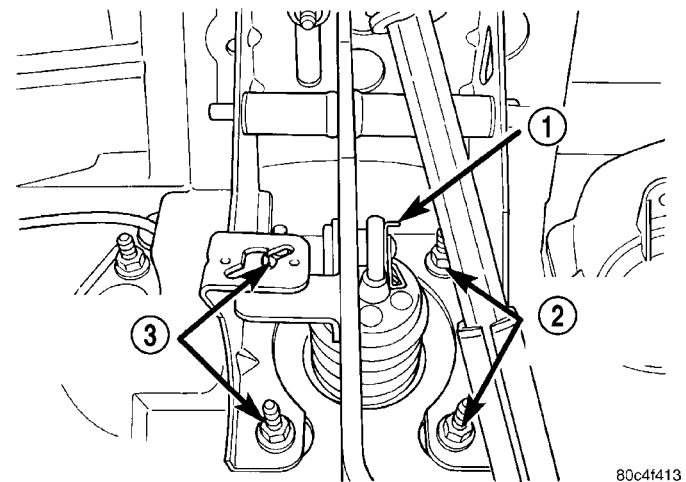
Brake Booster Mounting Nuts and Rod Retaining Clip
